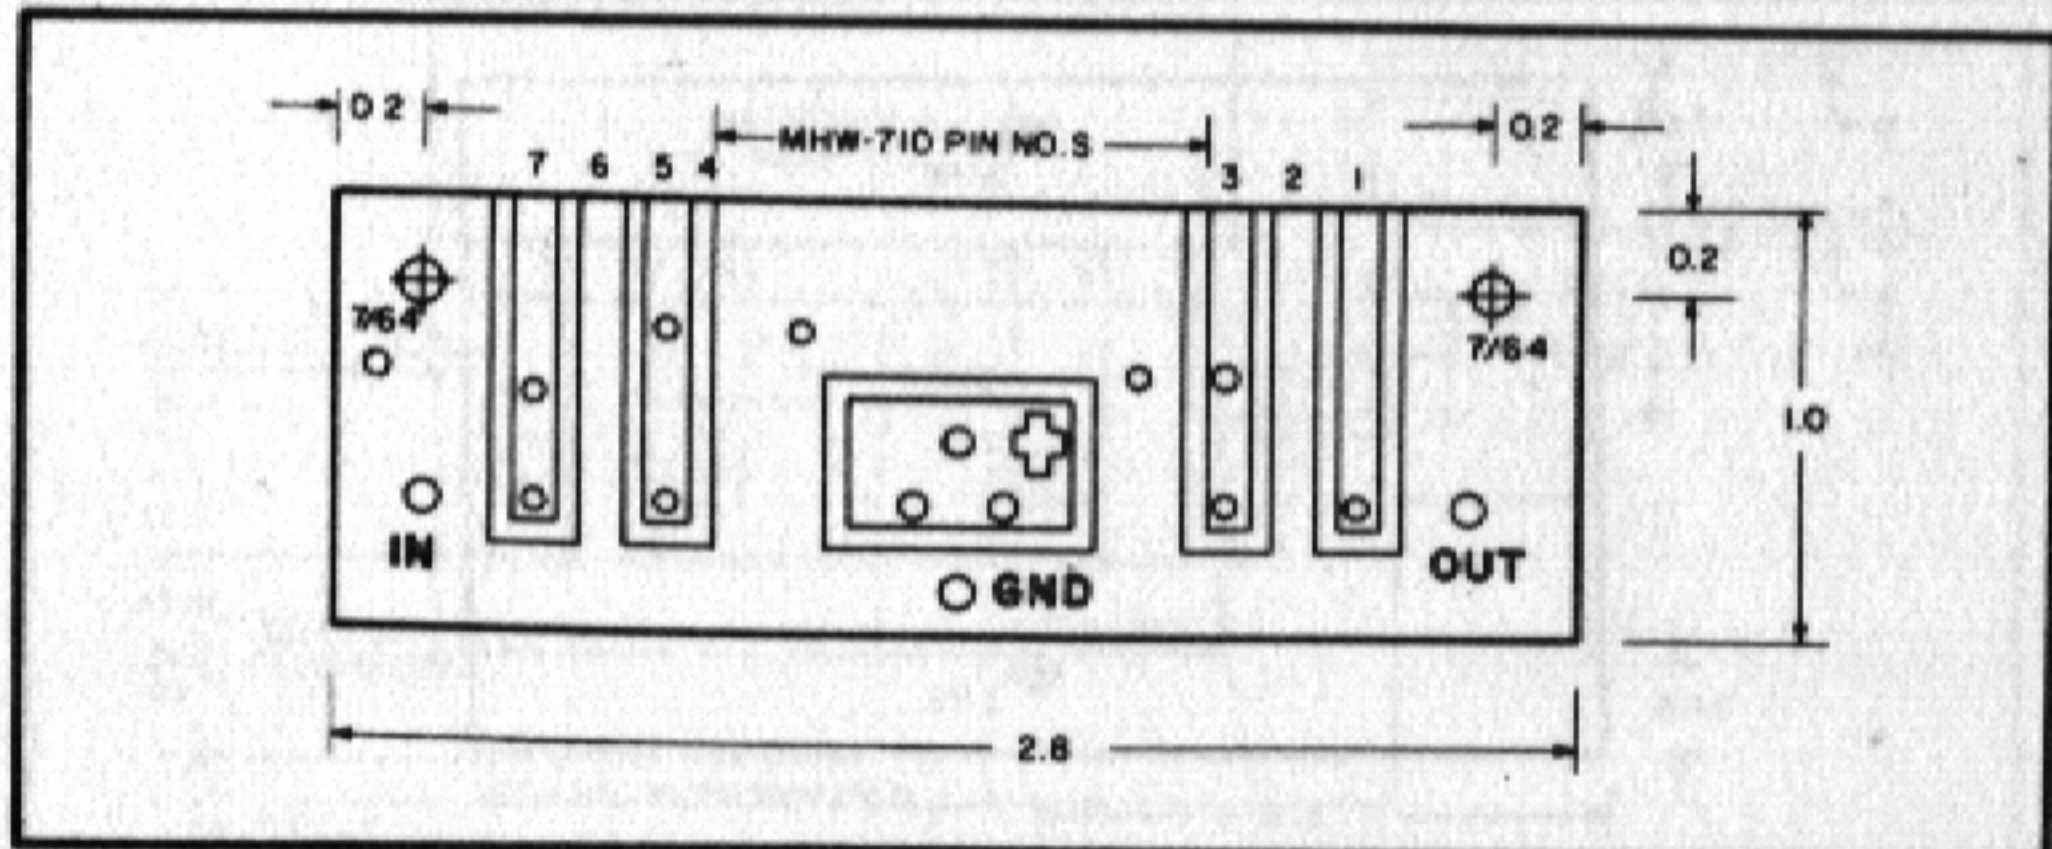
10 watt ATV amplifier PC board, foil side. All dimensions in inches. Board is glass.
